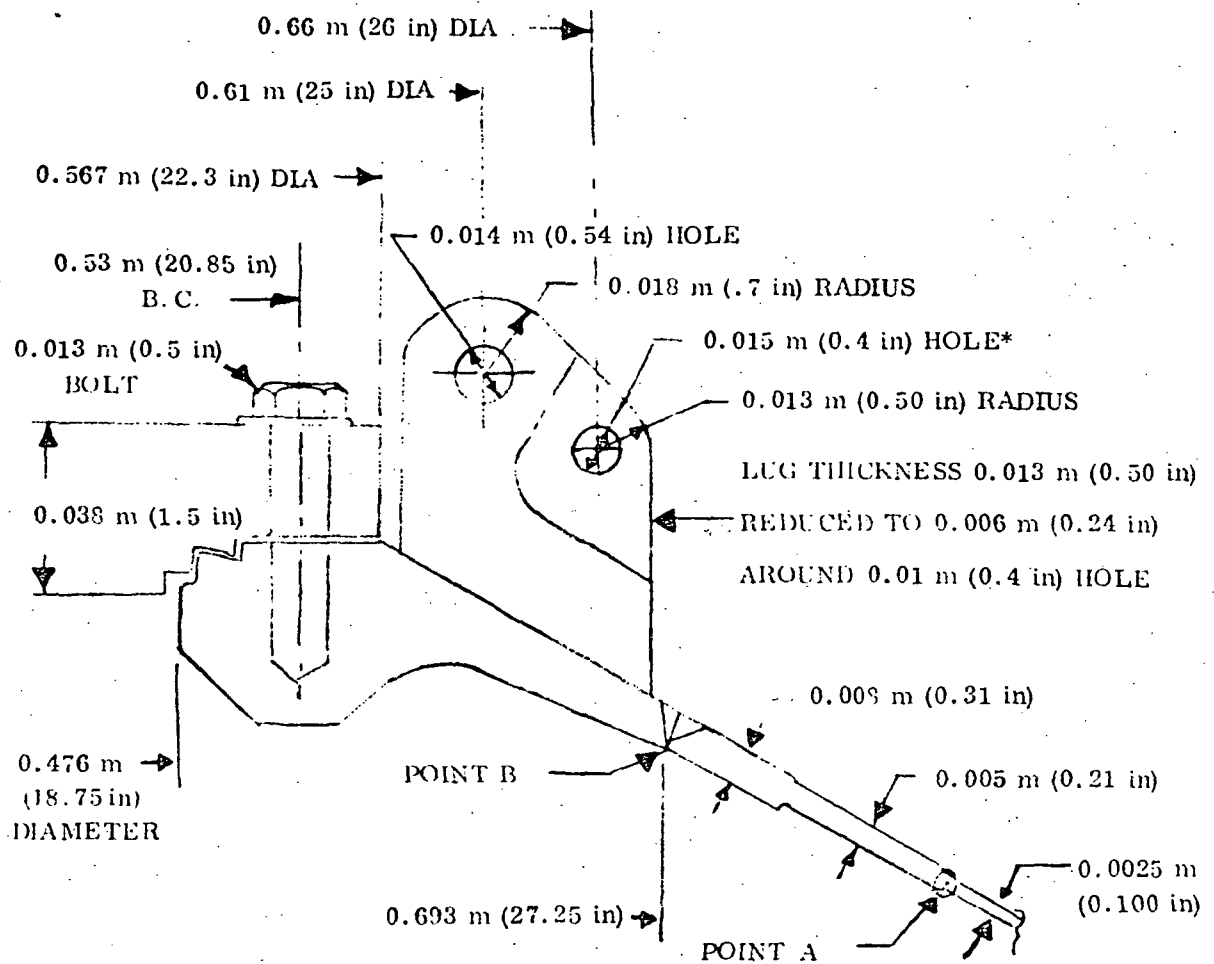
Large Manhole Access Door Ring and Lug of 1.52 m (60 in) Tank
